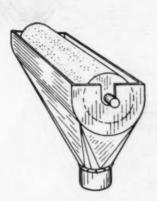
shows details of various standard valves used on the discharge pipe system. Fig. 75 shows the general construction of a standard two-way valve, the shell part of which is a two-way breeching from square to round, an offset being provided on the rectangle end in which the valve plate fits without obstructing the flow of material. This shoulder offset is made in many ways, as indicated in the sketch and diagram C and D. When made as at C, an arch is provided on the side a to allow the leaf to swing, while the side is straight, as at b.
